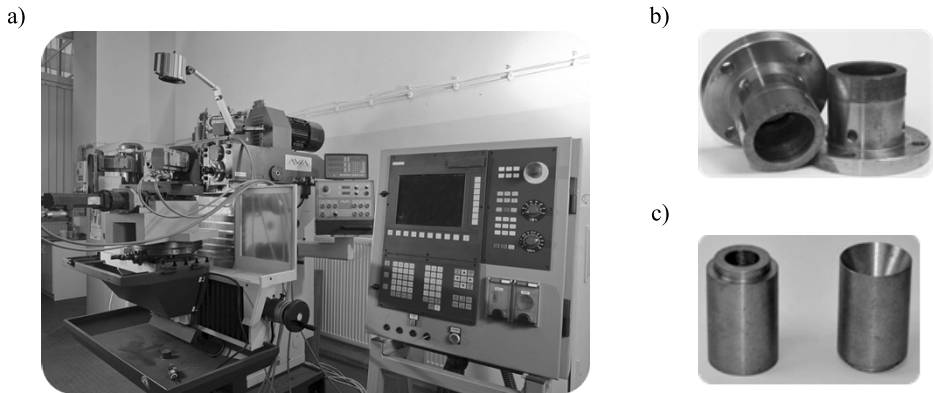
Machining device (a) and diamond tools for machining operations [L.18]: shaping (b), and finishing (c)
